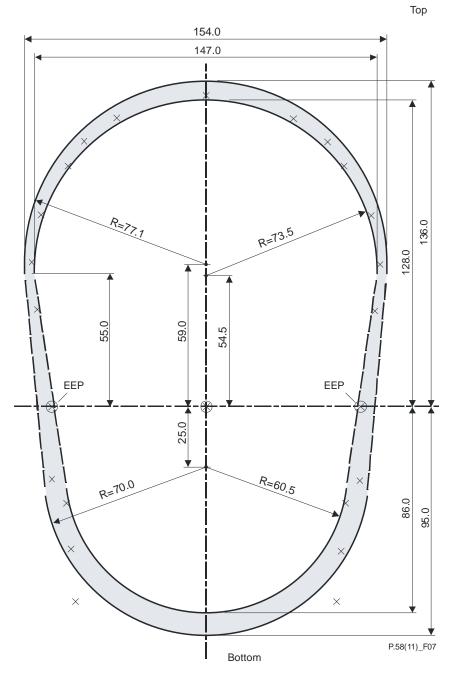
Limits of the head cross-section in the transverse plane (dimensions in mm)
